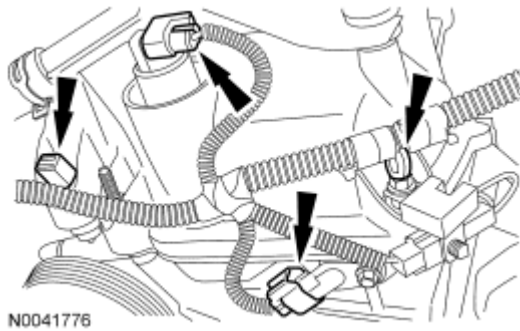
Locating RH VCT Solenoid And LH Camshaft Position Sensor Electrical Connectors
